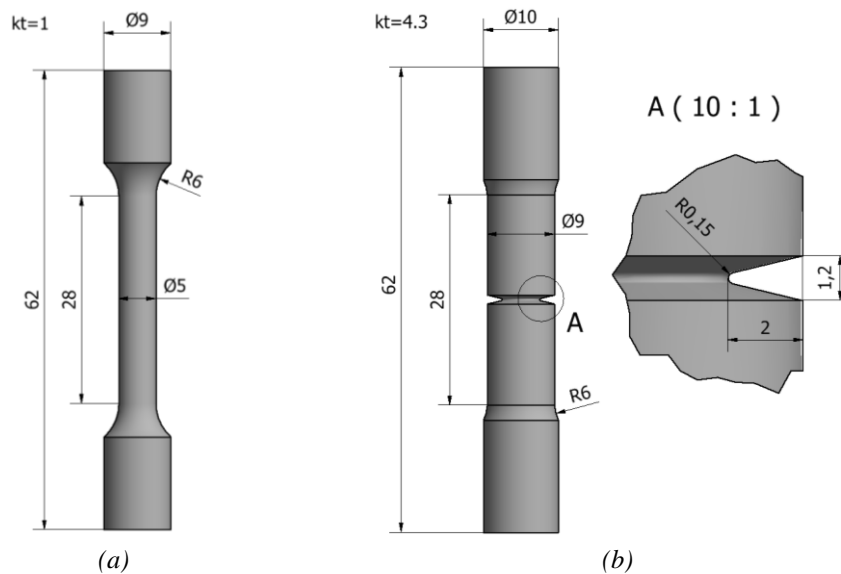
Geometry and dimensions (mm) of (a) smooth and (b) notched specimens used in the tensile tests.
